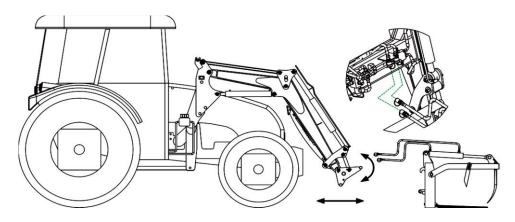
Installation of a tool which requires connection to the Loader hydraulic system
